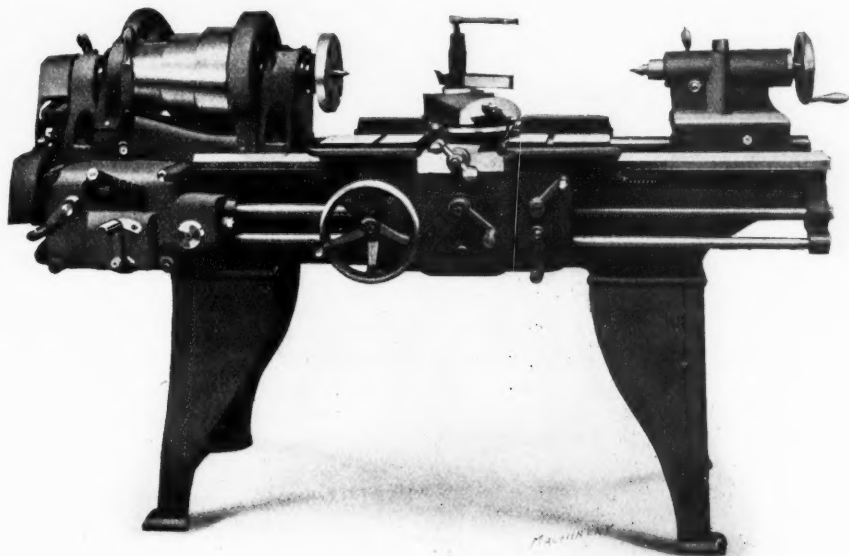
Sixteen-inch Lathe, built by John B. Morris Machine Tool Co.
